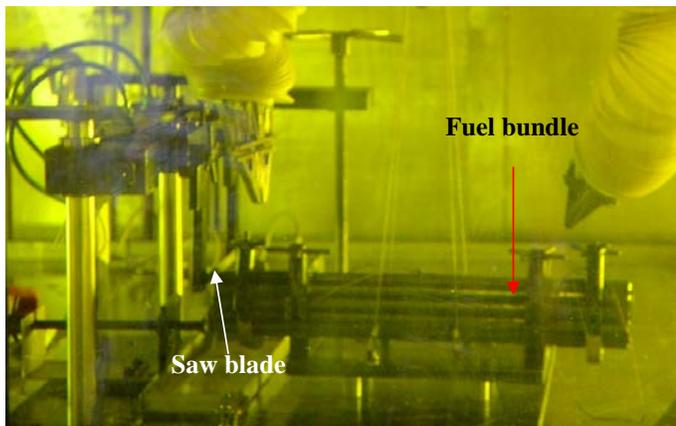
Saw blade based mechanical bundle dismantling machine installed inside the hot cells.
